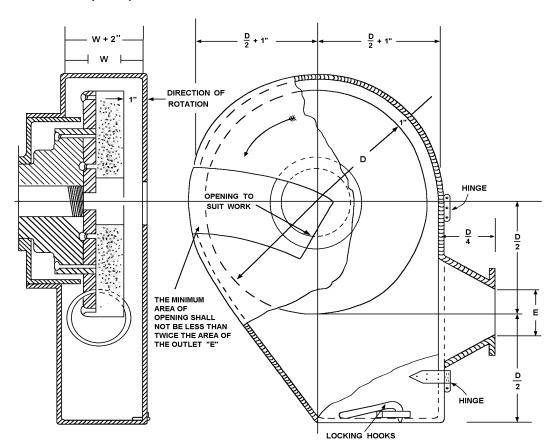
Horizontal Single-Spindle Disc Grinder Exhaust Hood and Branch Pipe Connection
